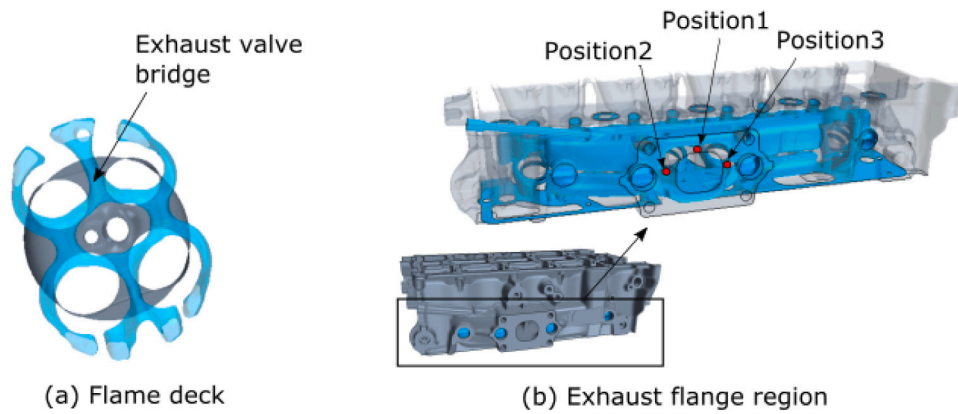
The geometry of the engine in the vicinity of (a) the flame deck (shown in gray) with the exhaust valve bridge indicated, the coolant jacket (shown in blue) (b) exhaust flange showing position of thermocouples. Surface of the coolant jacket is highlighted in blue color.
